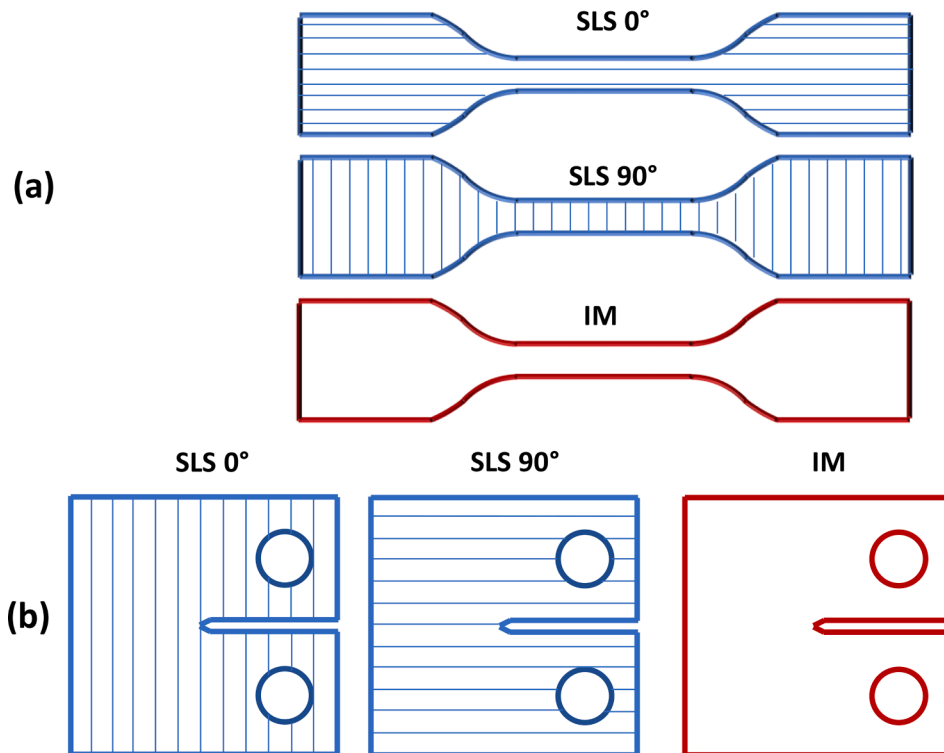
Geometry of the specimens used in the experimental program where lines show layer orientation in SLS: (a) Dumbbell specimens for tensile and fatigue life tests. (b) Compact tension (CT) samples for fracture and fatigue crack growth tests.
